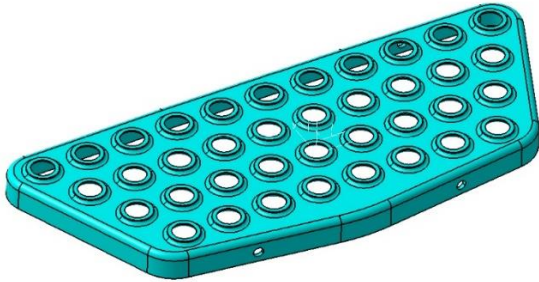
CATIA drawing of aluminum MAN truck step plate
